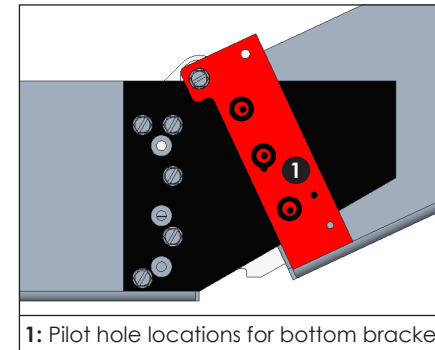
Jig Placement and Pilot Hole Locations (Bottom)
